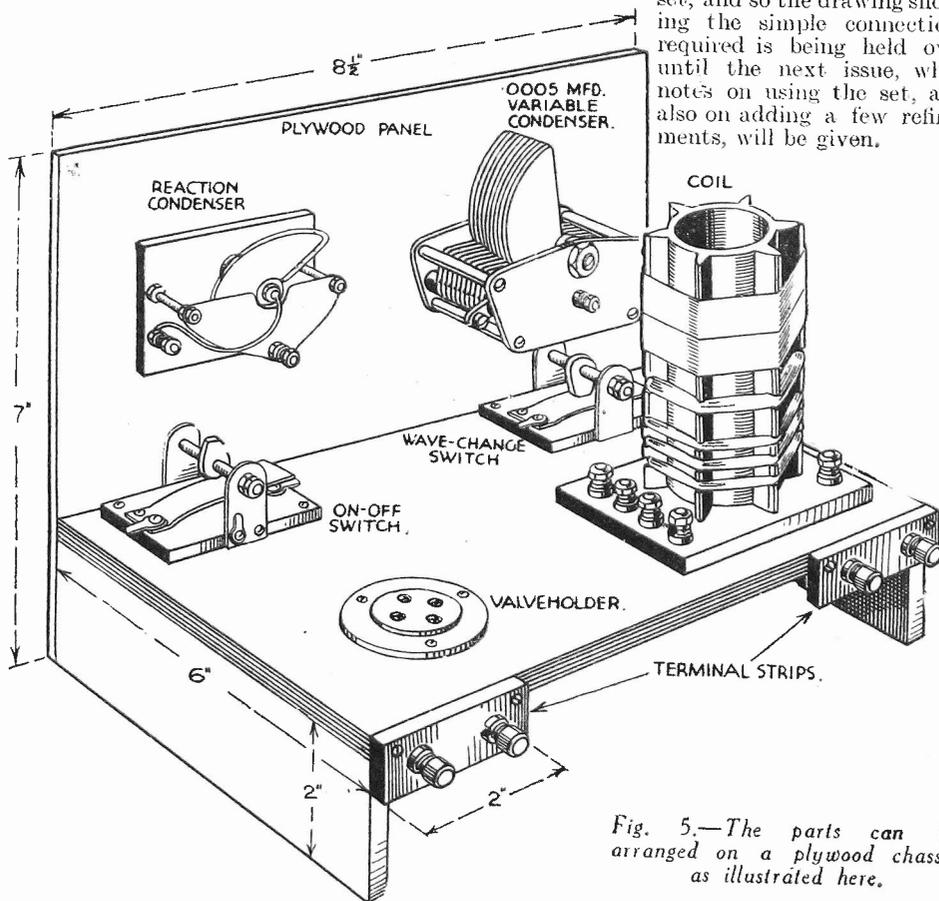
The parts can be arranged on a plywood chassis as illustrated here.
